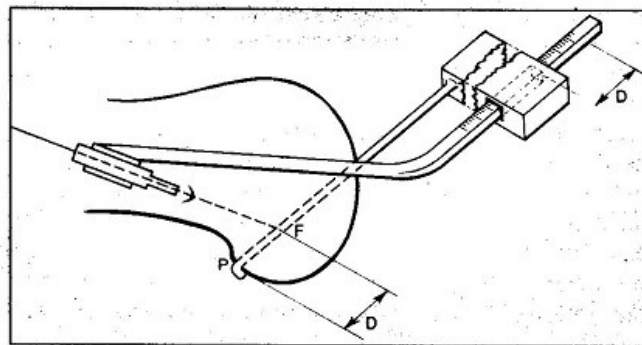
Adjusting the visor for the distance FP, will assure the centre of the drill to end up in point F.
